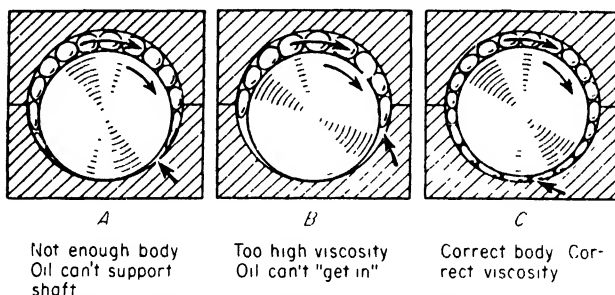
Effects of viscosity in lubricating a bearing.
